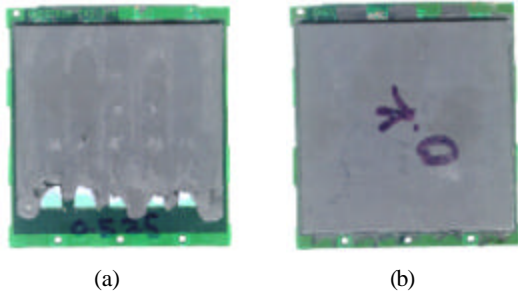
Flip chip package with overmolding by (a) improper condition (b) optimized condition
